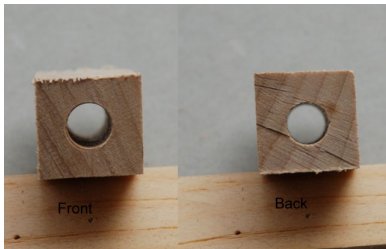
The front and back of a test pen blank after drilling with the aux jaws.
